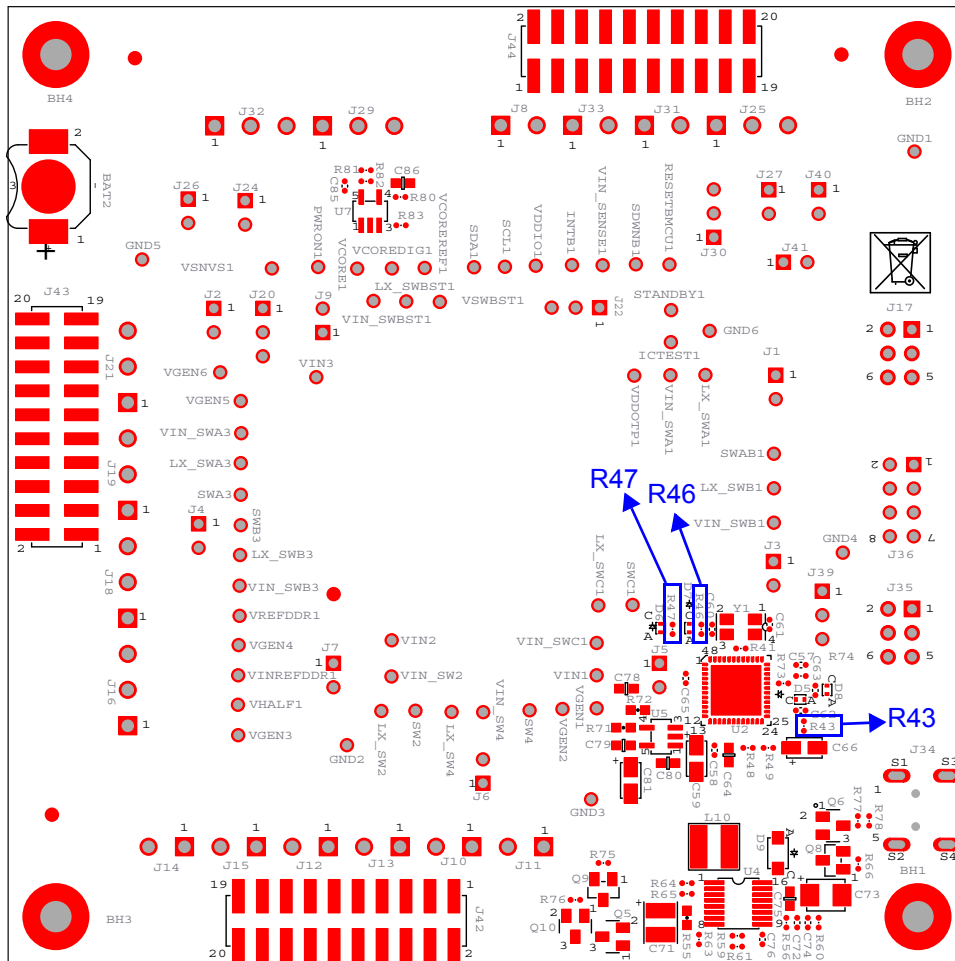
KITPF0100EPEVBE Bottom View - Components Location
